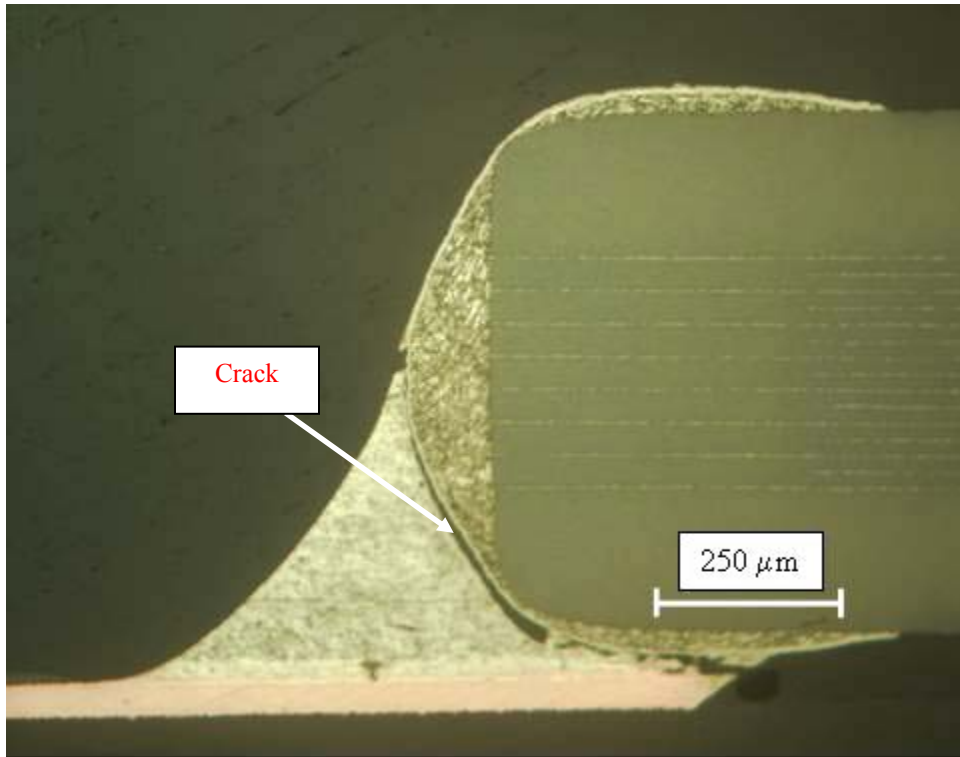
Crack in the solder joint of a flexible-termination MLCC manufactured by Syfer and tested in a four point bend test.
